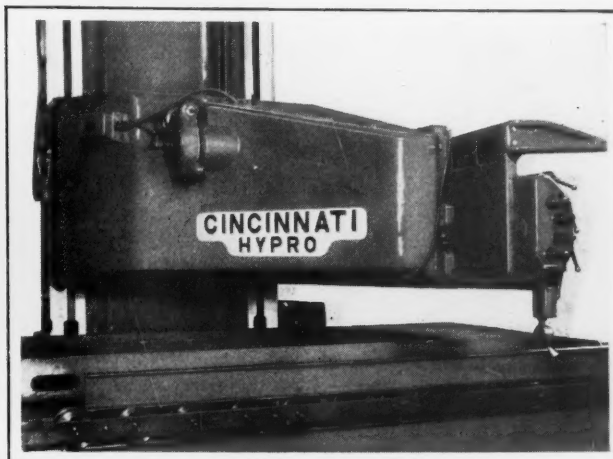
Supplementary Rolling Table and Torque Motor of Open-side Planer
